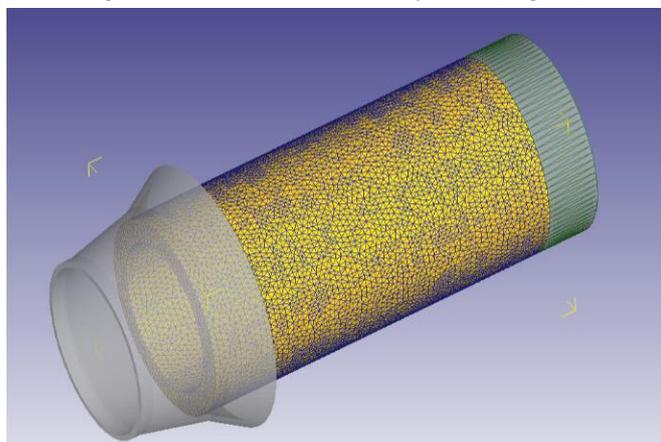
Die, workpiece (tube) and punch designed in CAD/CAE system
